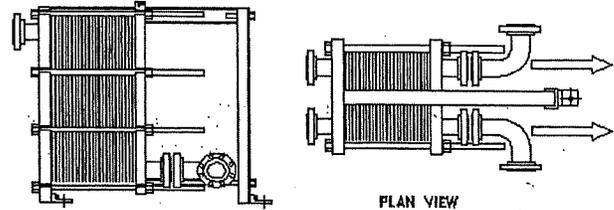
Mobile Head Fitted with Spool Nozzles
